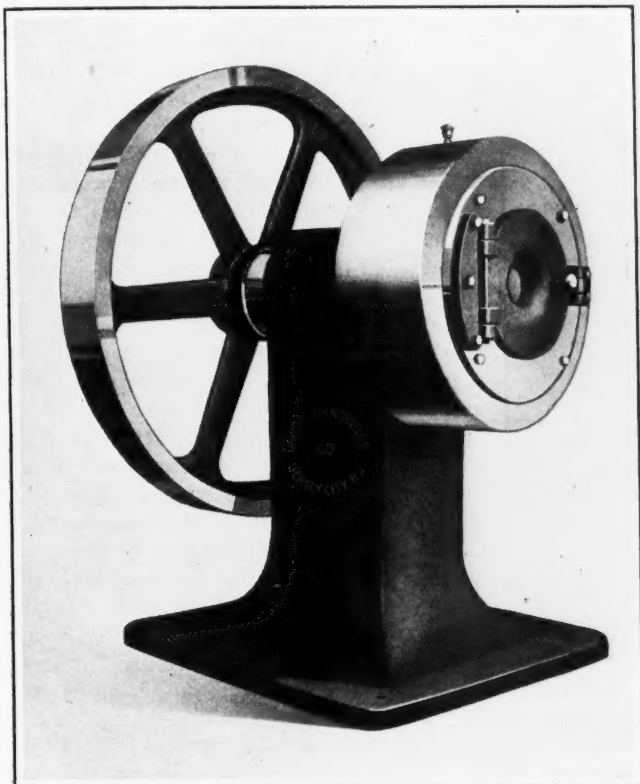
Rotary Swaging Machine with Ten or More Rolls in the Head
